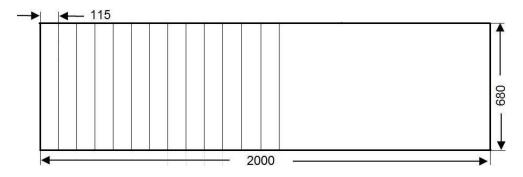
Schematic Illustration of Dimensions of Strips cut from Sheet Metal
